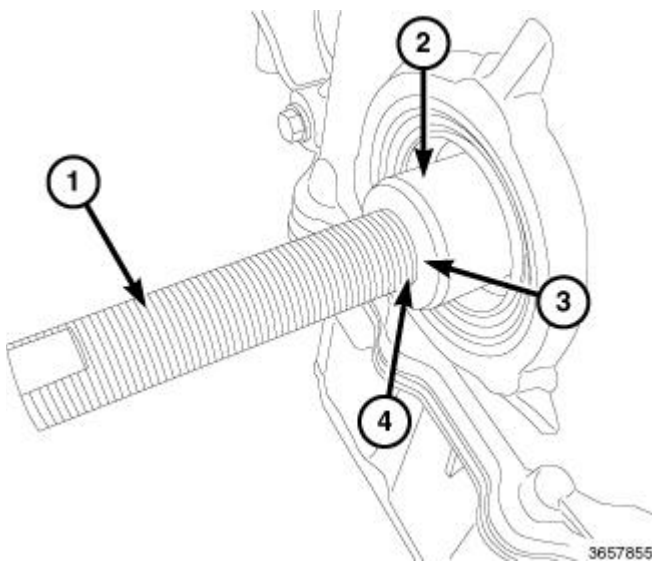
Installing Vibration Damper Onto Crankshaft Using Special Tool
